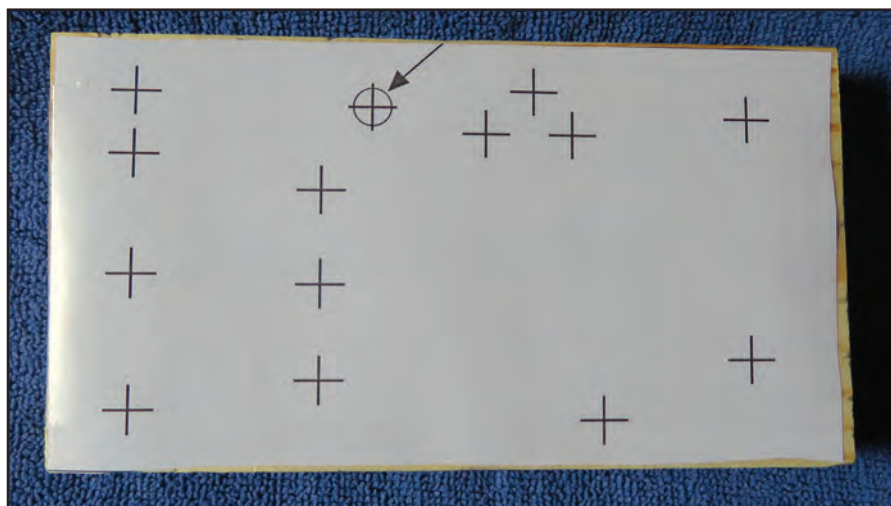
Photo B. The template is cut out from the manual and taped onto the supplied pine board.
